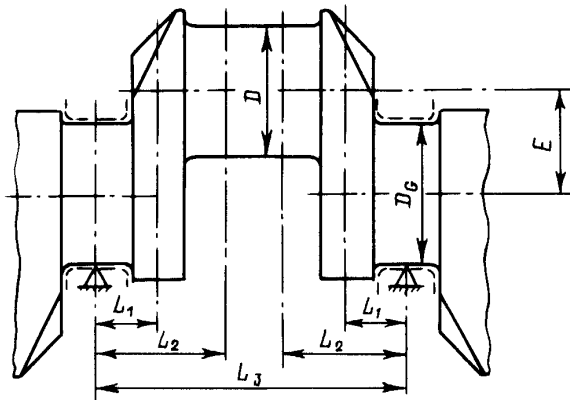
Crank throw for engine with 2 adjacent connecting rods
